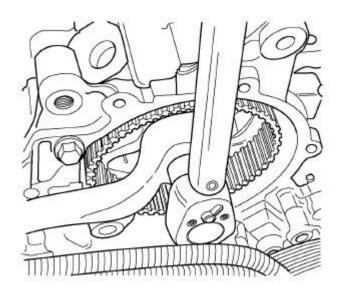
LEFT CAMSHAFT SPROCKET Courtesy of CHRYSLER LLC
